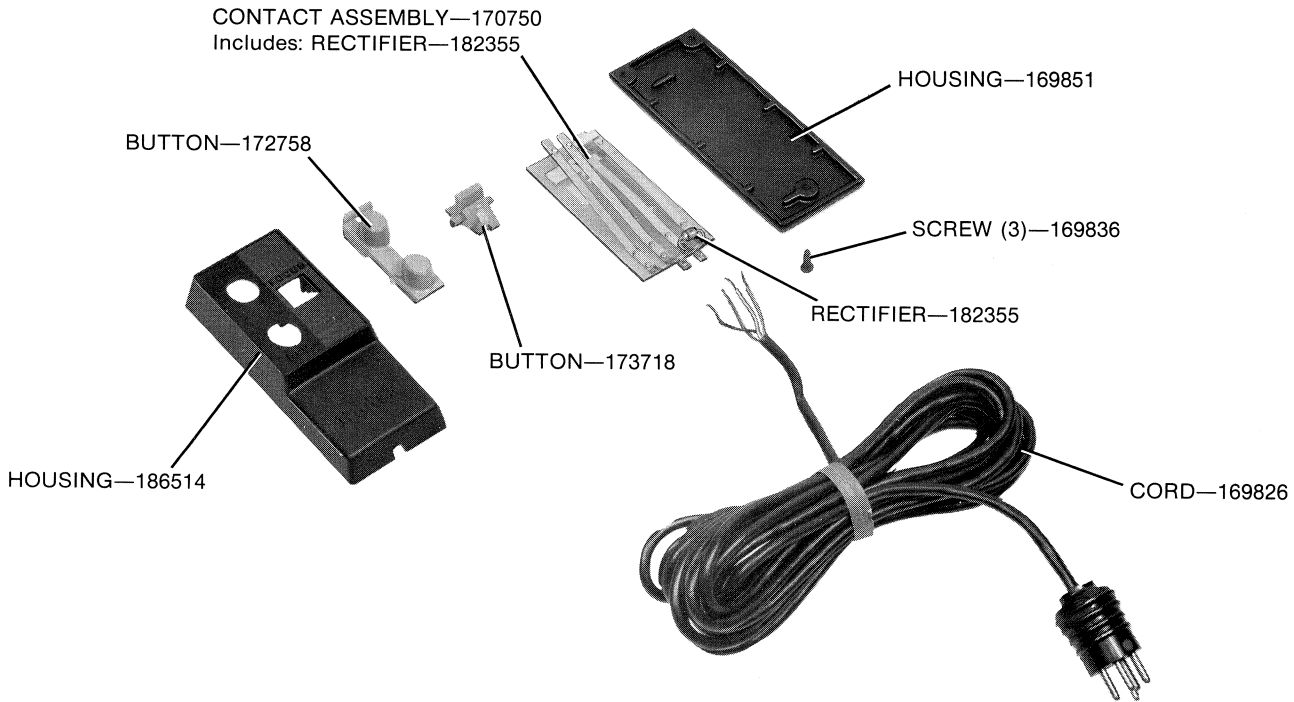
REMOTE CONTROL ASSEMBLY (750, 750H, 800, and 800H PROJECTORS)
